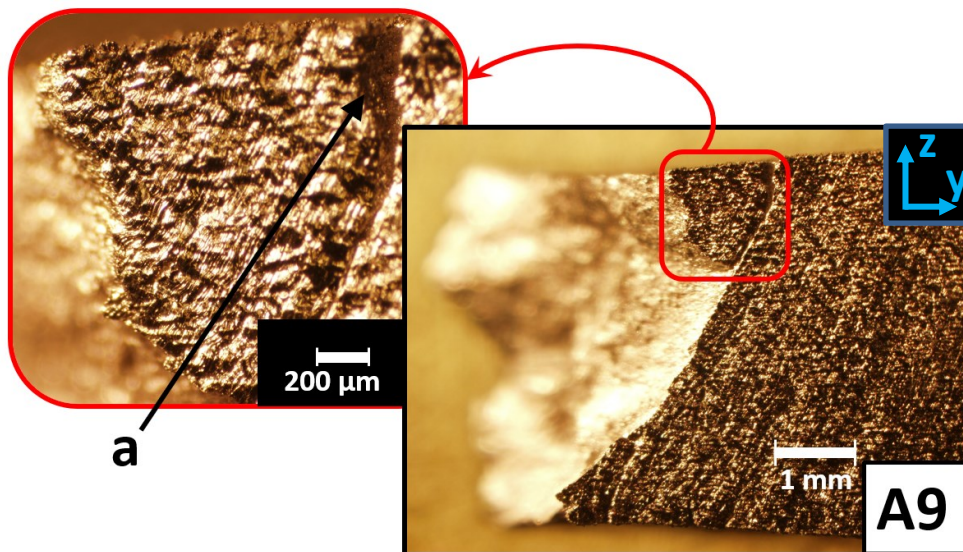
Sample A9 (180.4 J/mm) fracture zone observed under optical microscope. a: Secondary cracks of width 150 to 200 μm were observed close to fracture zone
